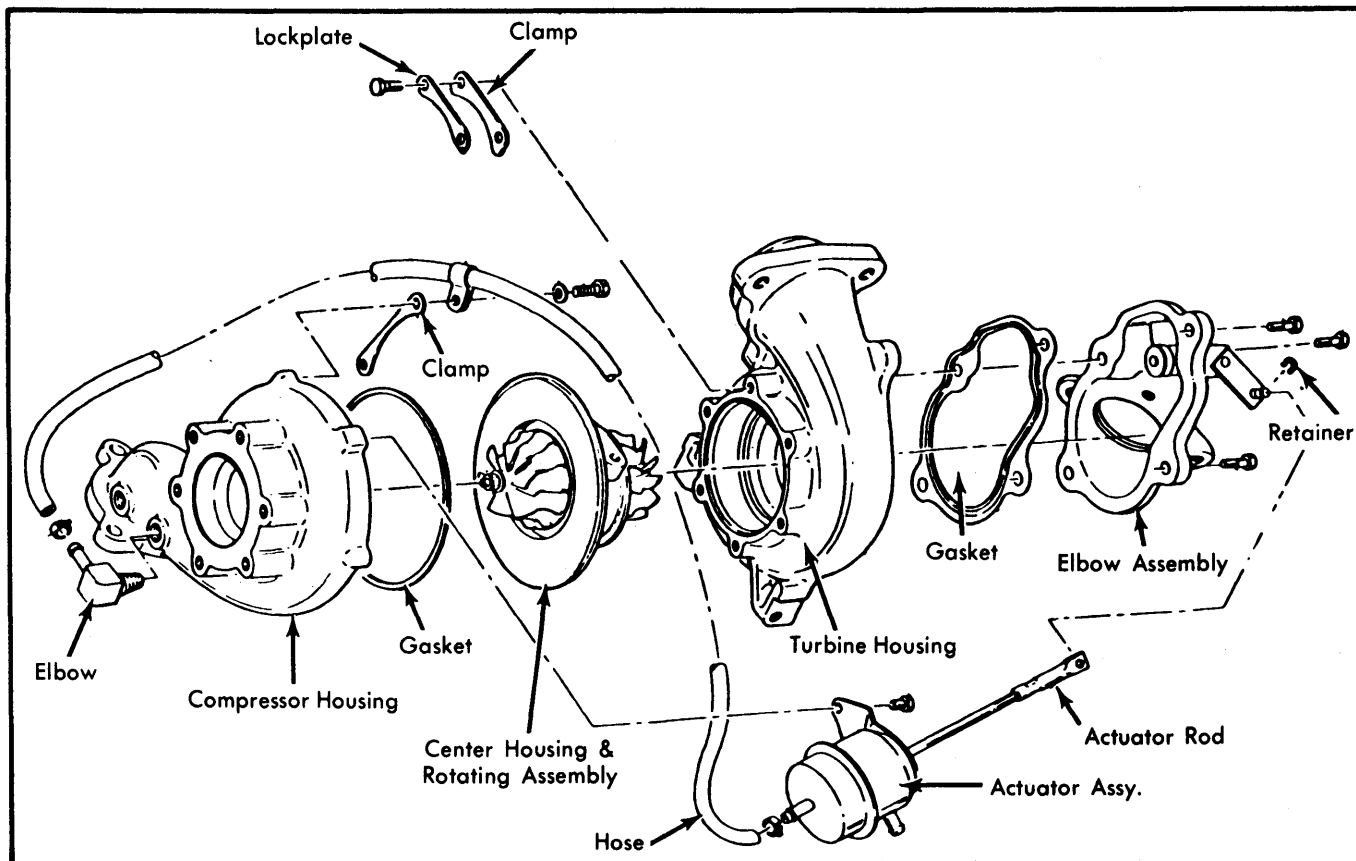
Exploded View of Turbocharging System On GM V6 Engines
